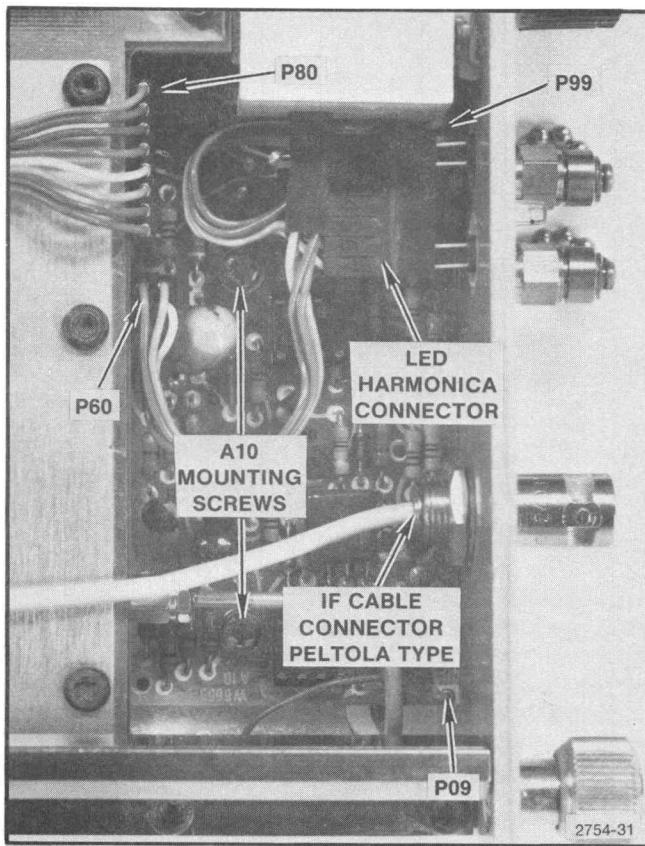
Removing the 1st LO assembly and indicator board.
